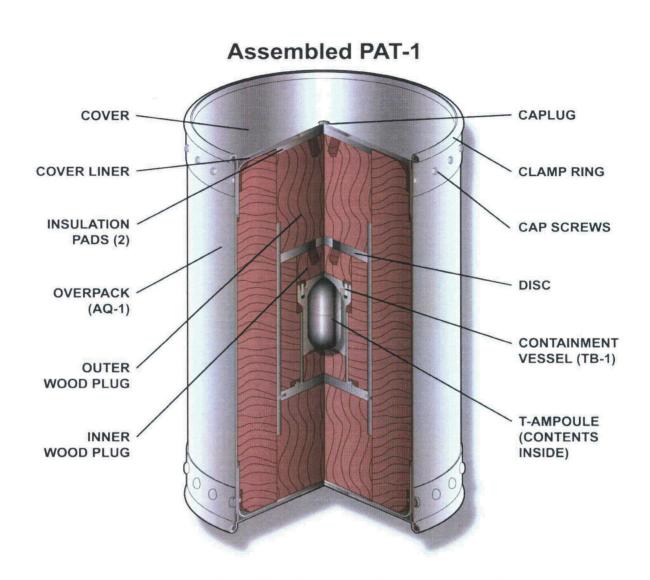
Assembled PAT-1 Showing AQ-1, TB-1, and T-Ampoule
